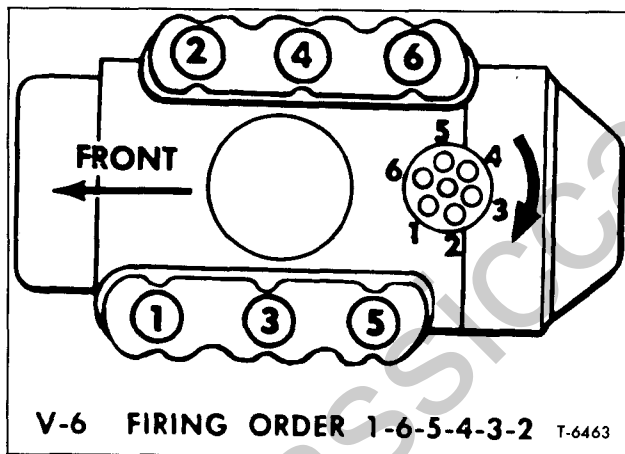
Cylinder Numbering and Spark Plug Wire Locations for V6 Engine
